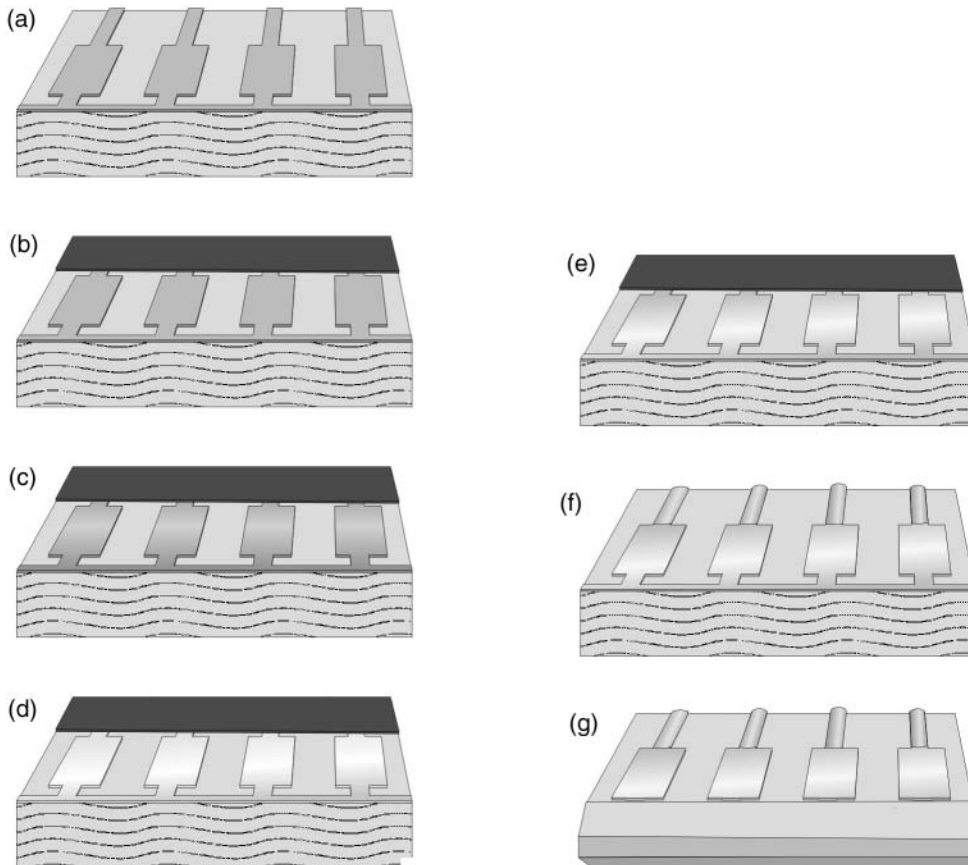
Edge card contact manufacturing steps: (a) etched contacts with bus, (b) apply chemical resistant tape, (c) etch solder (or other metal), (d) plate nickel barrier metal, (e) plate gold over nickel, (f) remove tape from circuit, and (g) shear bus and bevel edge.
